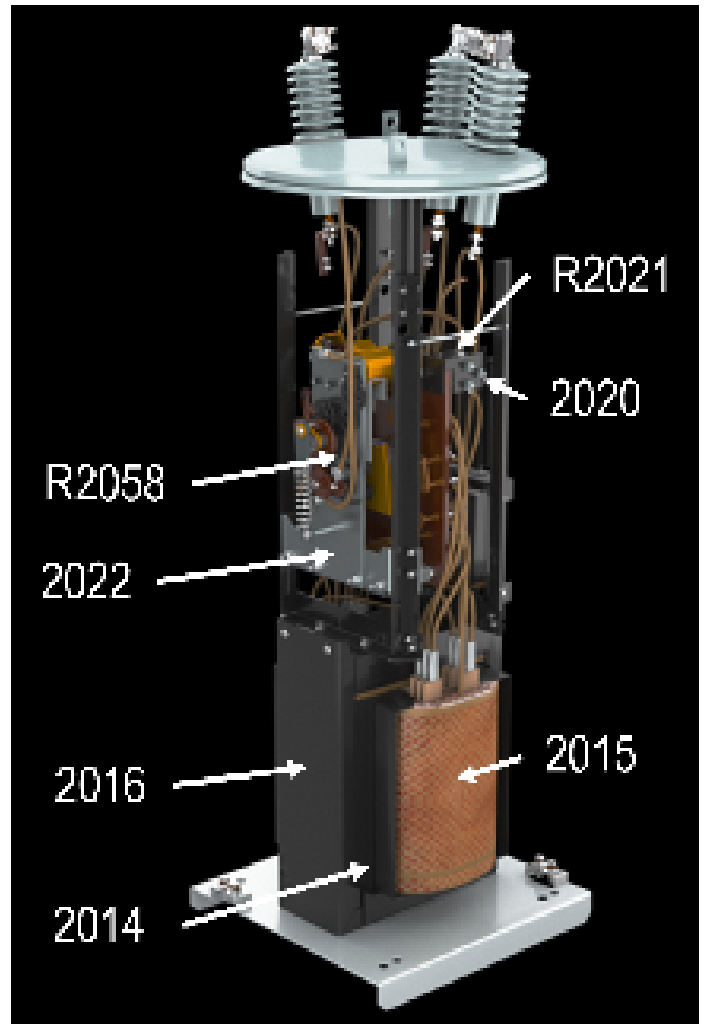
Type VR-1, Mechanism Side with Control Cabinet Removed
